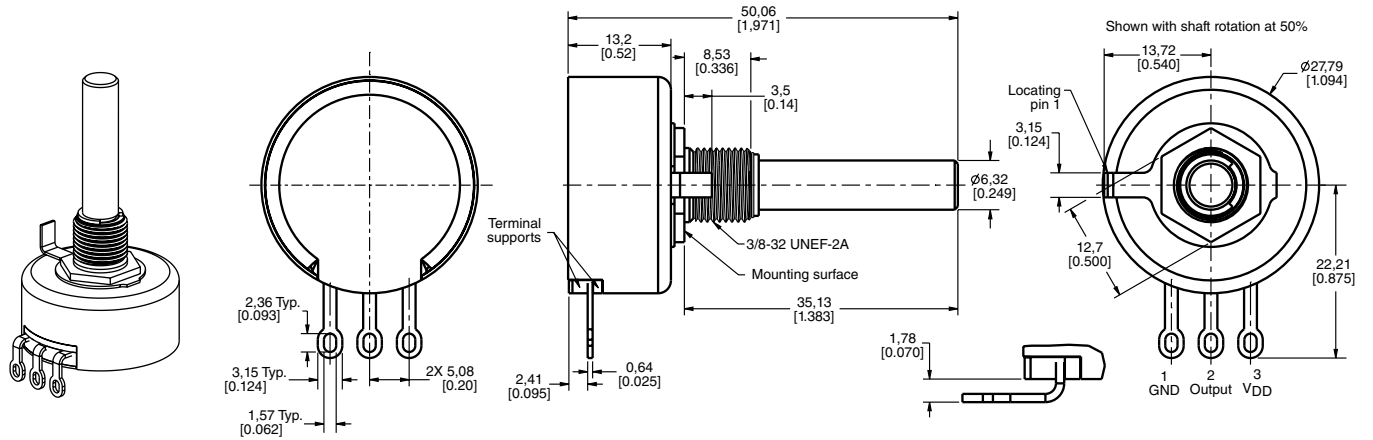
Dimensional Drawings (For reference only: mm [in.] )
